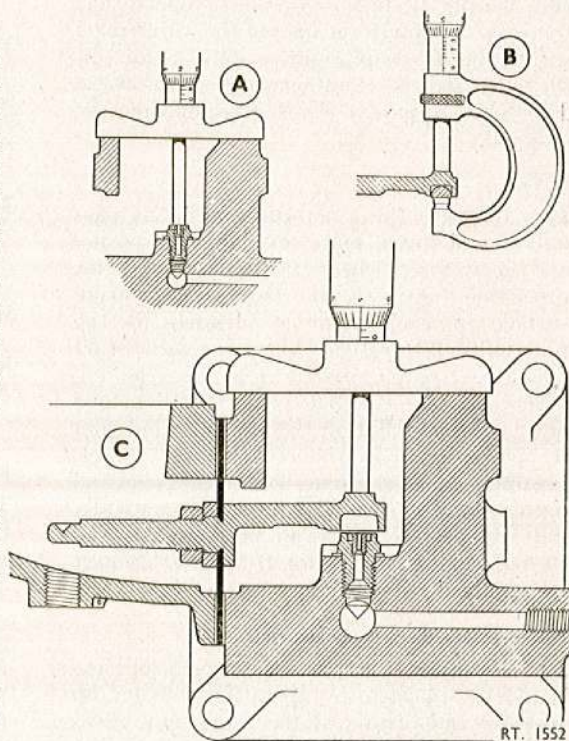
Method of checking half-ball valve setting (pre-Mod. 217)
